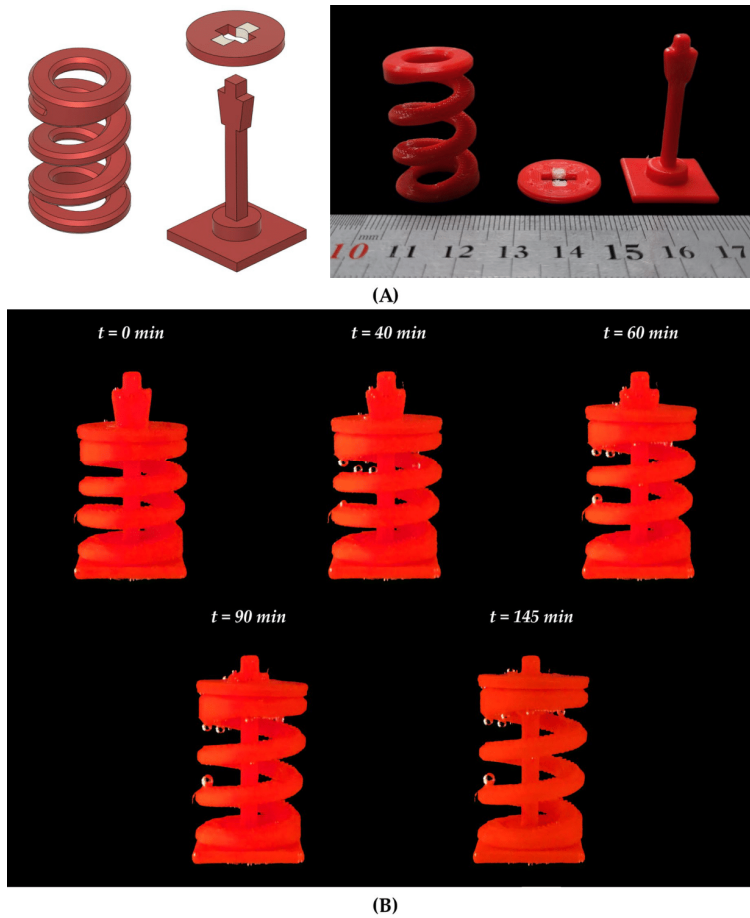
(A) CAD models & prototypes and (B) shape-morphing test for actuator 12.
